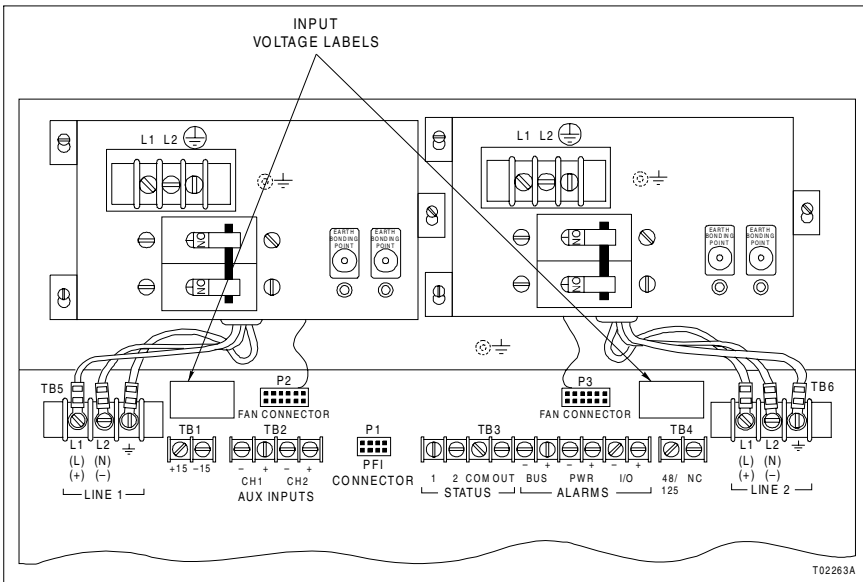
Fan Assembly and Power Entry Circuit Breaker or Switch Installation (Rear View)
